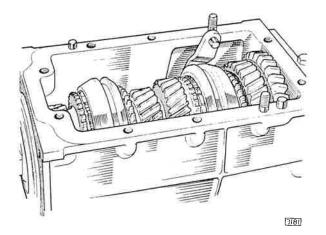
Re-assembled gearbox prior to refitting of top cover.
